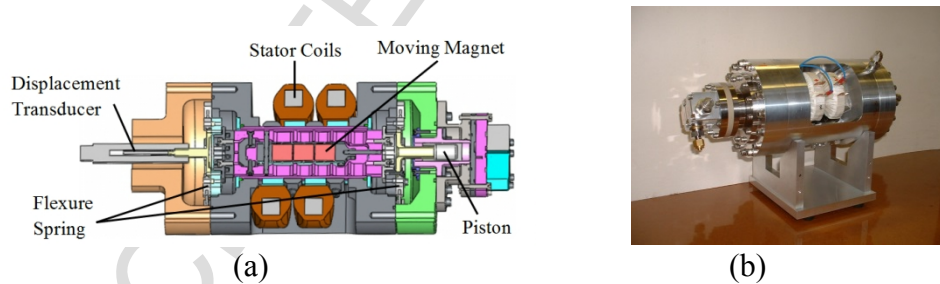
Oil-free linear compressor: (a) moving magnet linear compressor configuration (Liang et al. [15]); (b) prototype linear compressor for lower pressure ratios
